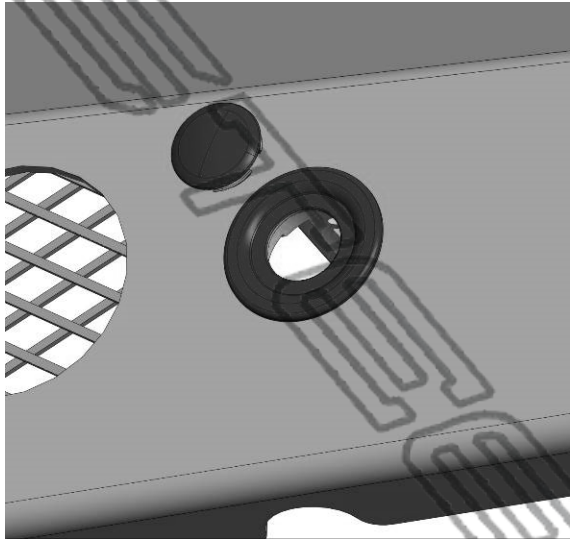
Remove sensors, wire harness, license plate lights, trailer plug and spare tire access lock (pictured) if equipped
